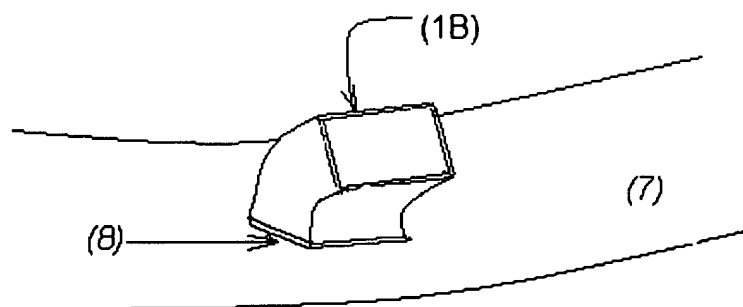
A view of the separate windshield heated air supply outlet with a male connector.
